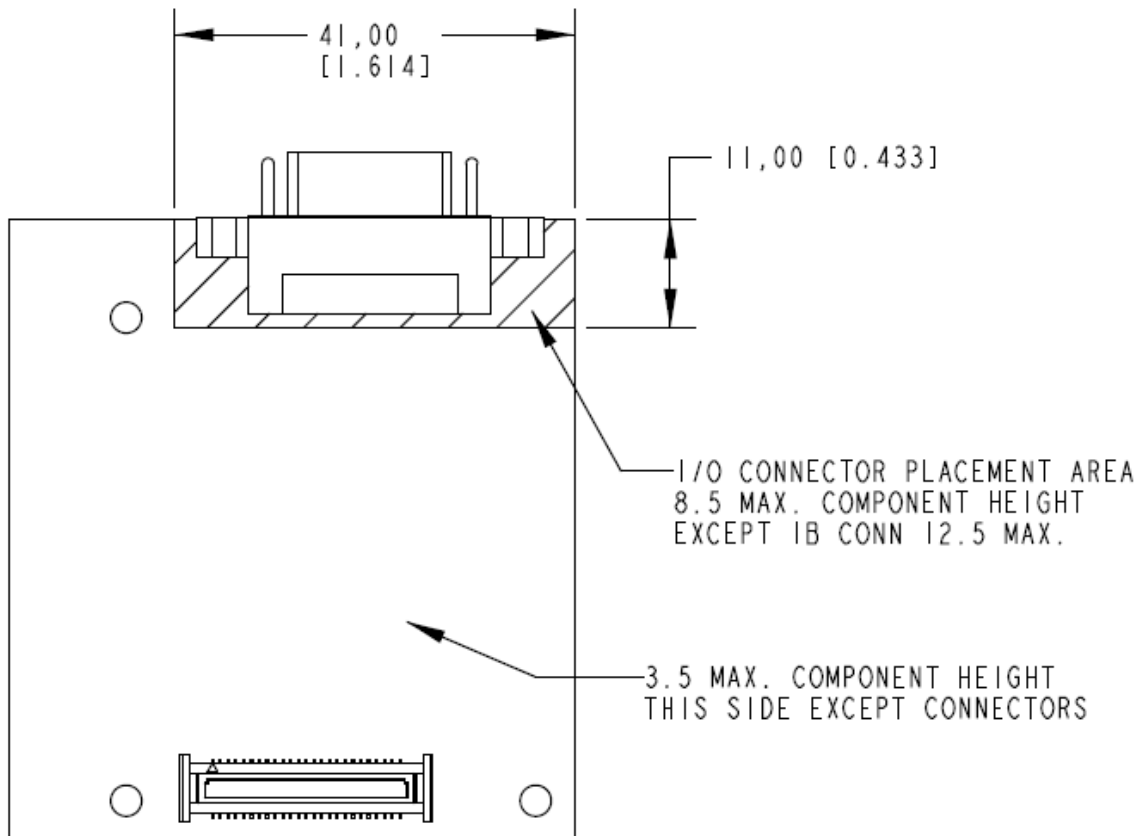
InfiniBand* I/O Module Dimensions; Bottom View
